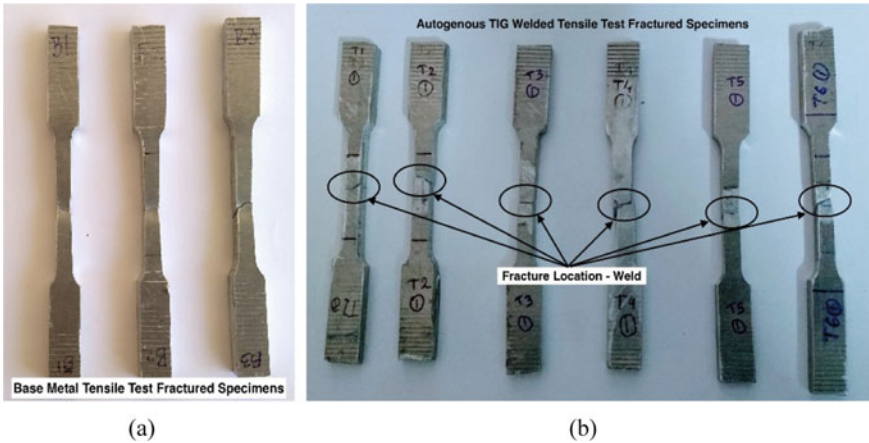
Fractured tensile specimen: a base metal; b autogenous TIG Weld
